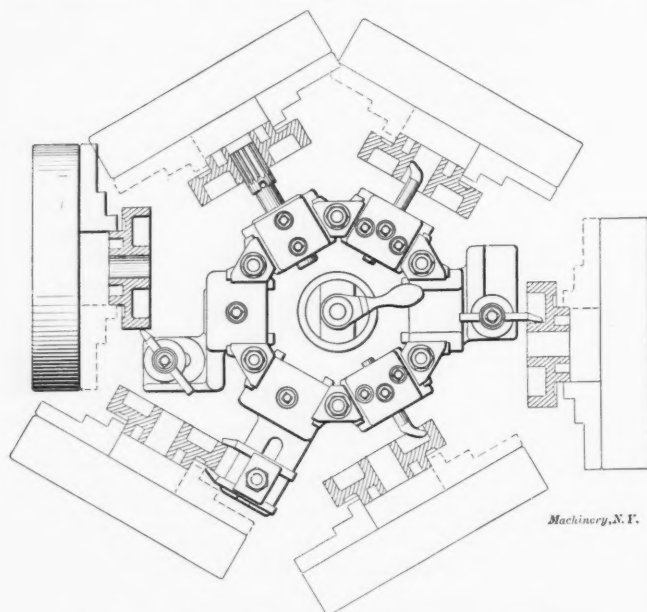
Typical Layout of Operations for Finishing a Casting.
